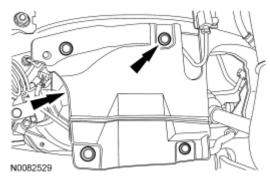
Locating Engine Roll Restrictor Bolt Courtesy of FORD MOTOR CO.
